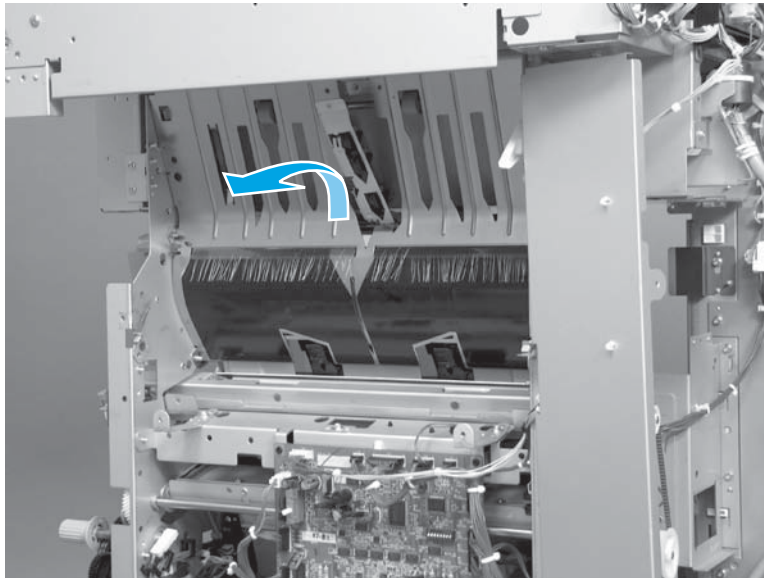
Remove the saddle rear end sensor assembly (7 of 10)
